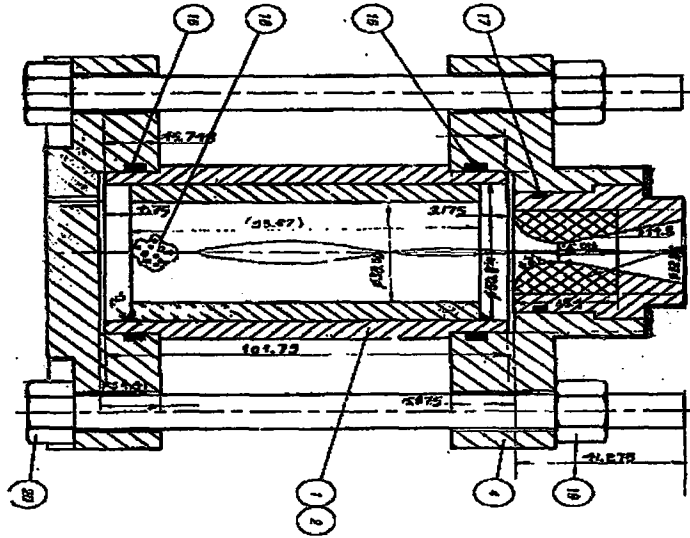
2x4 Test motor. 1D Motor test case I.
